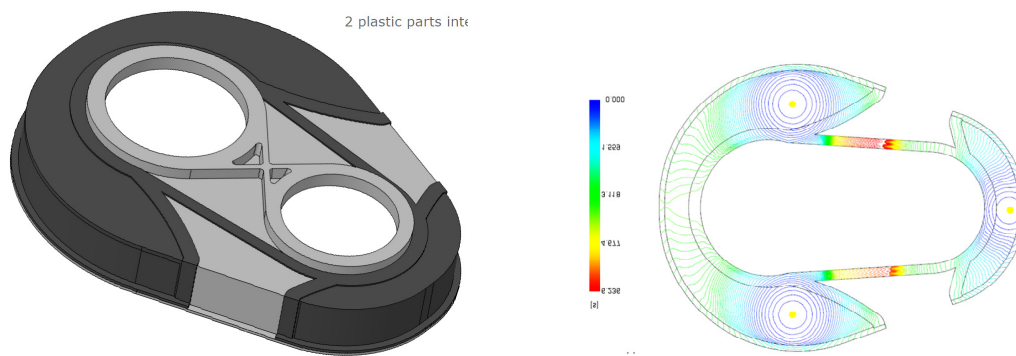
(left) CAD design with 2 plastic bridges providing mechanical interlock. It is however not manufacturable by injection insert moulding (simulation result on the right) due to excessive fill time causing weld lines and air traps.
